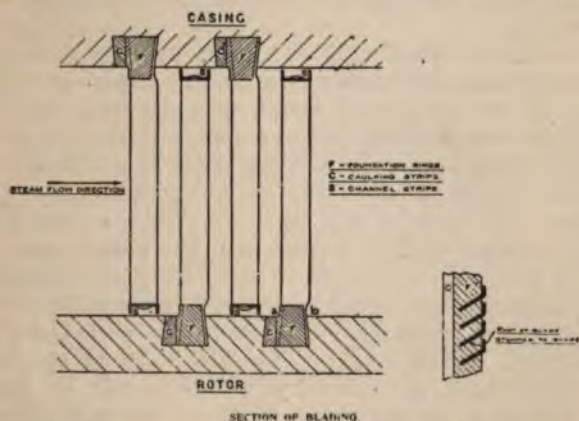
Willans' arrangement of Rotor and Stator Blades, with their Containing Rings, and the Joints to Shaft and Casing.
